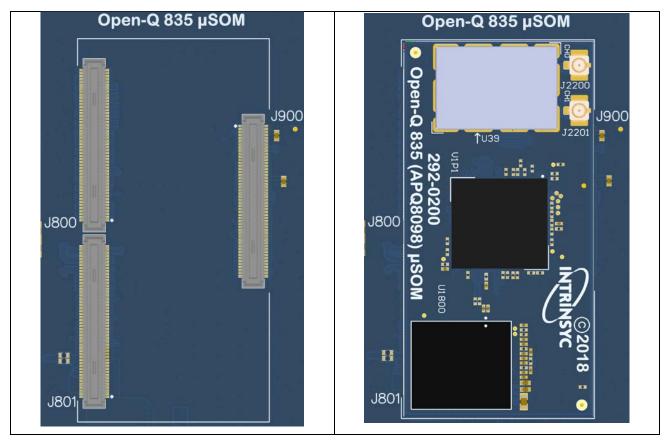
J800, J801, J900 uSOM Board to Board Connectors
